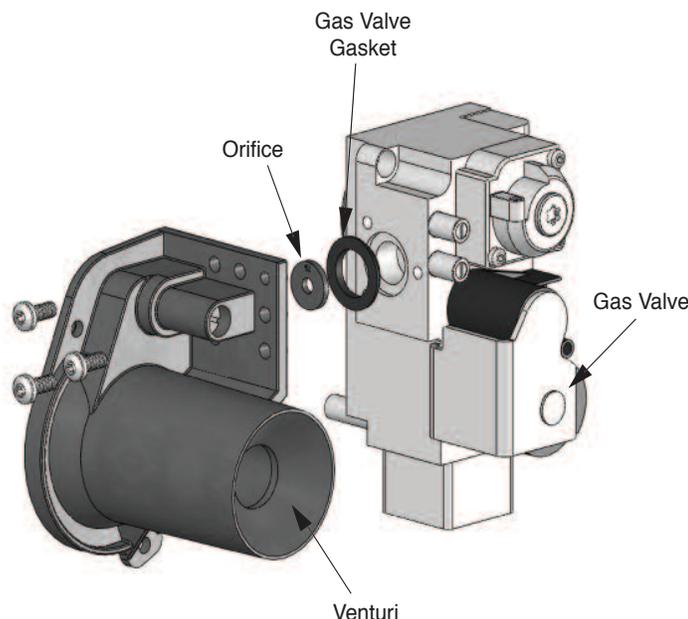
Gas Valve / Venturi Assembly - PRESTIGE Solo 60/110/175/250
